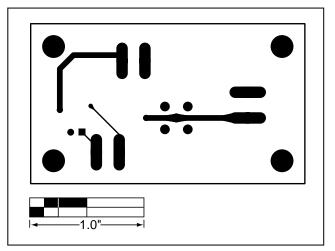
MAX881R EV Kit PC Board Layout—Solder Side
